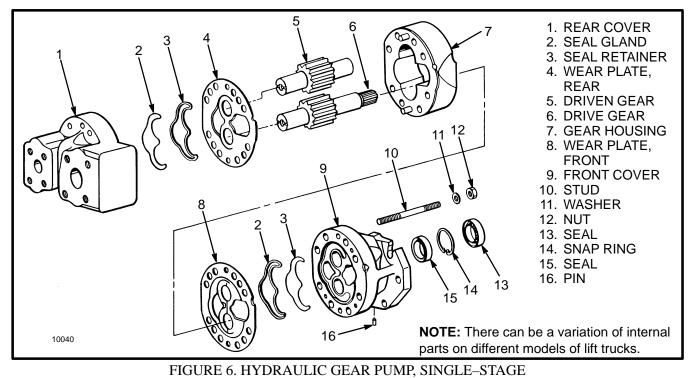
HYDRAULIC GEAR PUMP, SINGLE-STAGE
